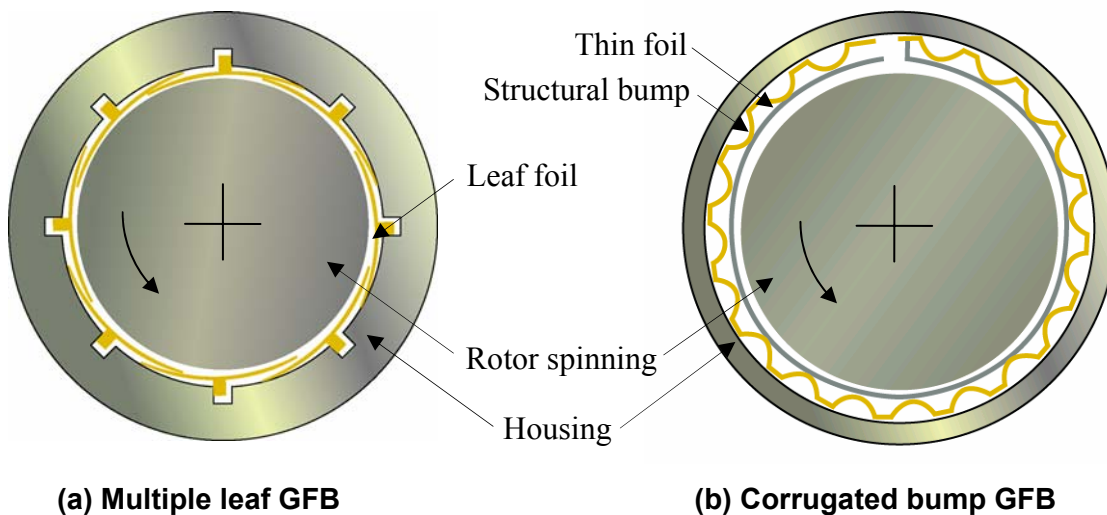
Typical Gas Foil Bearings for oil-free turbomachinery
